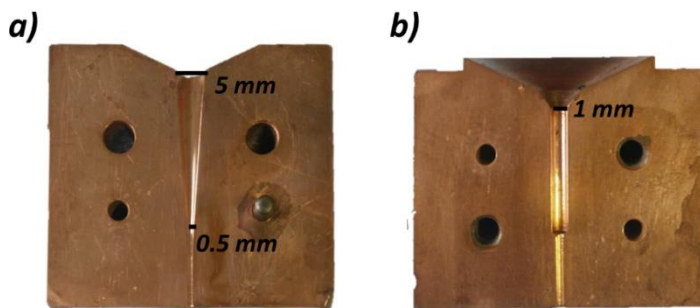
Conical (a) and cylindrical (b) Cu moulds employed to produce CMC samples.
